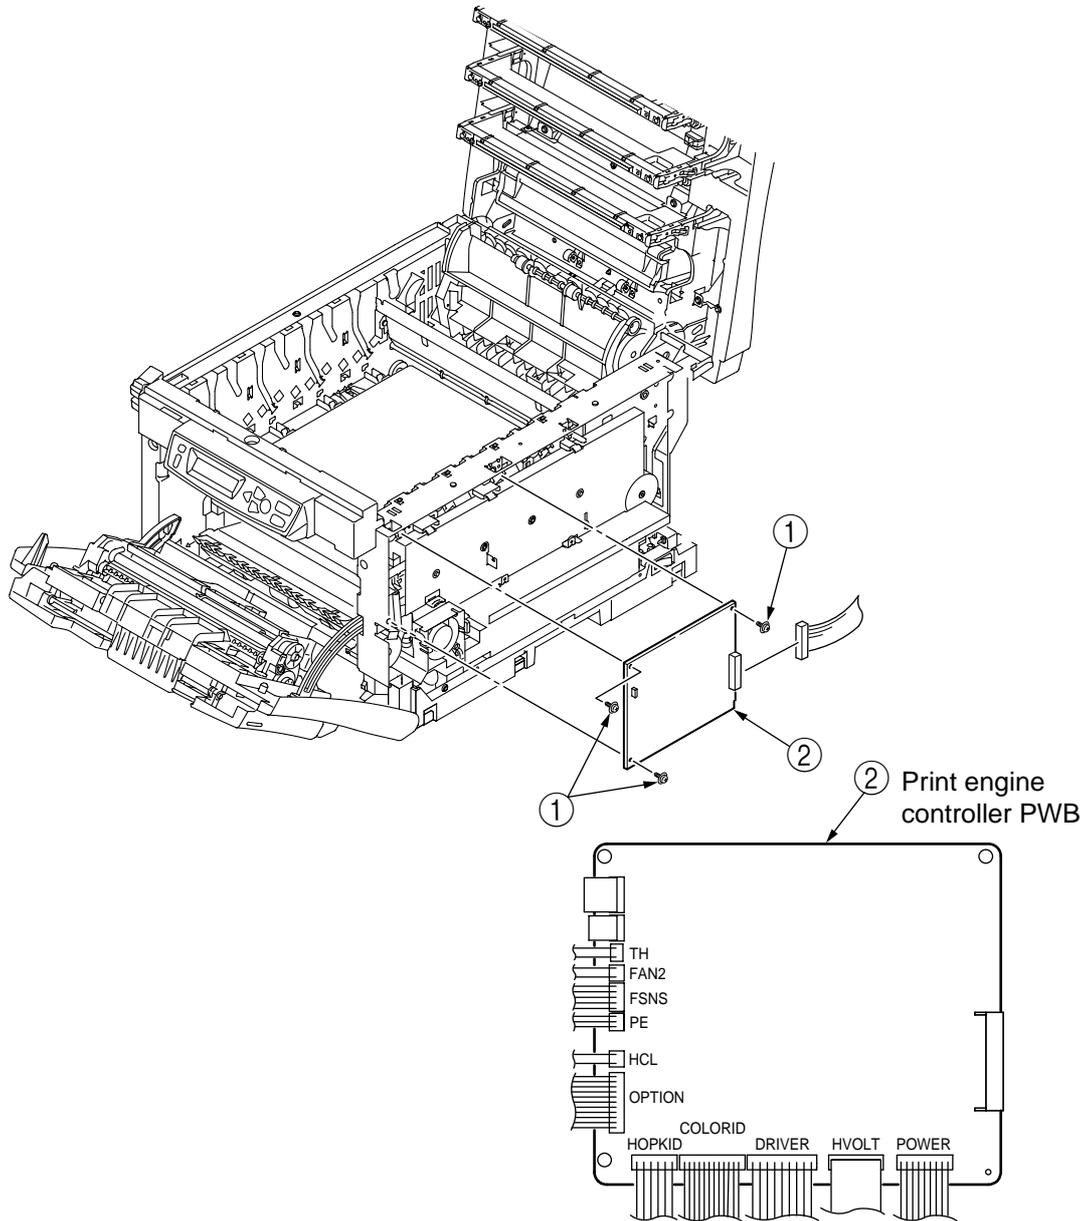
Print Engine Controller PWB (C5100)
